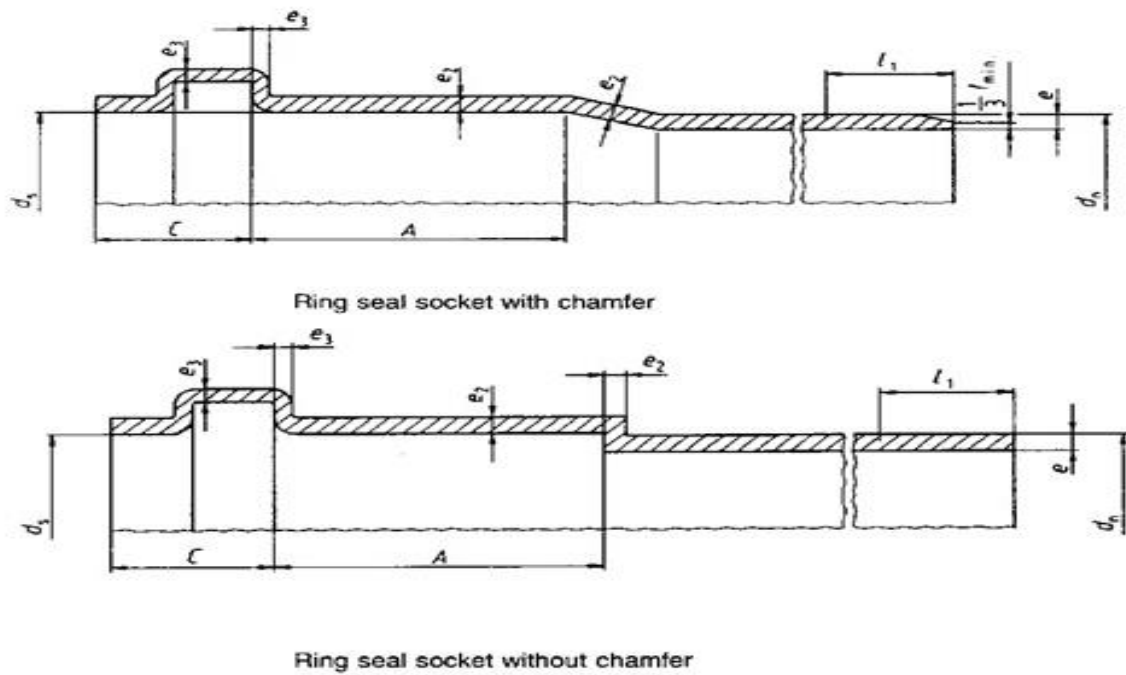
DIMENSIONS OF SOCKETS AND SPIGOT ENDS FOR RING SEAL JOINTS
